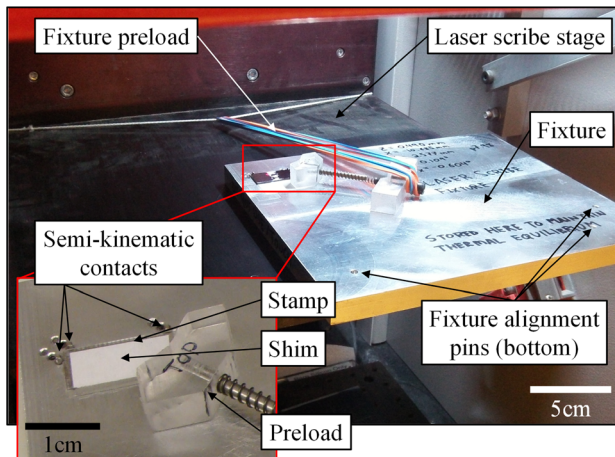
Glass stamp in laser scribe fixture, which is used to align the gage patterning to the coordinate frame defined by the edges of the stamp
